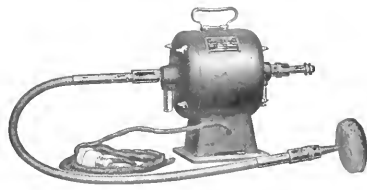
BUFFING AND GRINDING MOTOR WITH FRICTION SHAFTING
